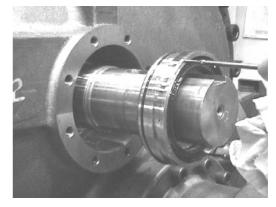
Inner stationary side seal Fig. 3-13 Inner stationary side seal
